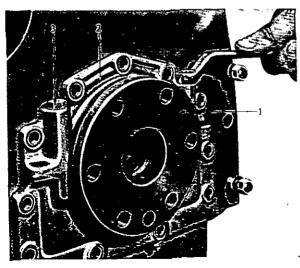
Tightening Oil Seal Housing Setscrew.
